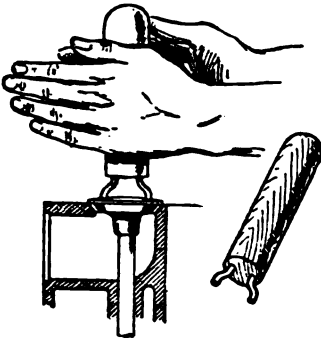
Illustrating the method of truing up a valve seat and reaming a worn valve stem guide.
